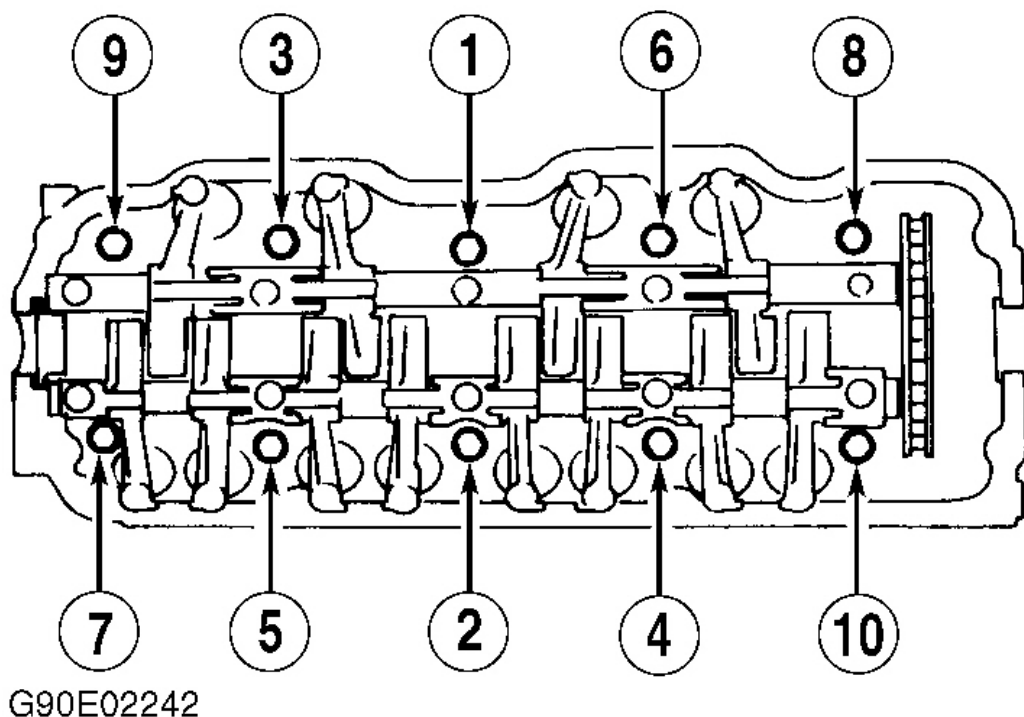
Cylinder Head Bolt Tightening Sequence (Pickup Shown; Others Similar)
